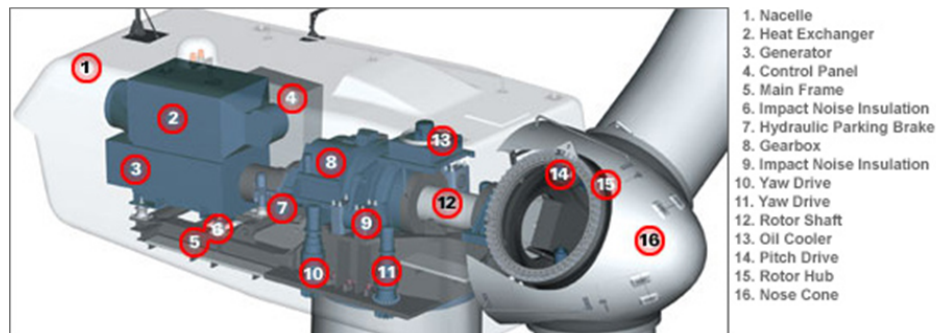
Technical drawing of a 3.6 GE wind turbine[4]
